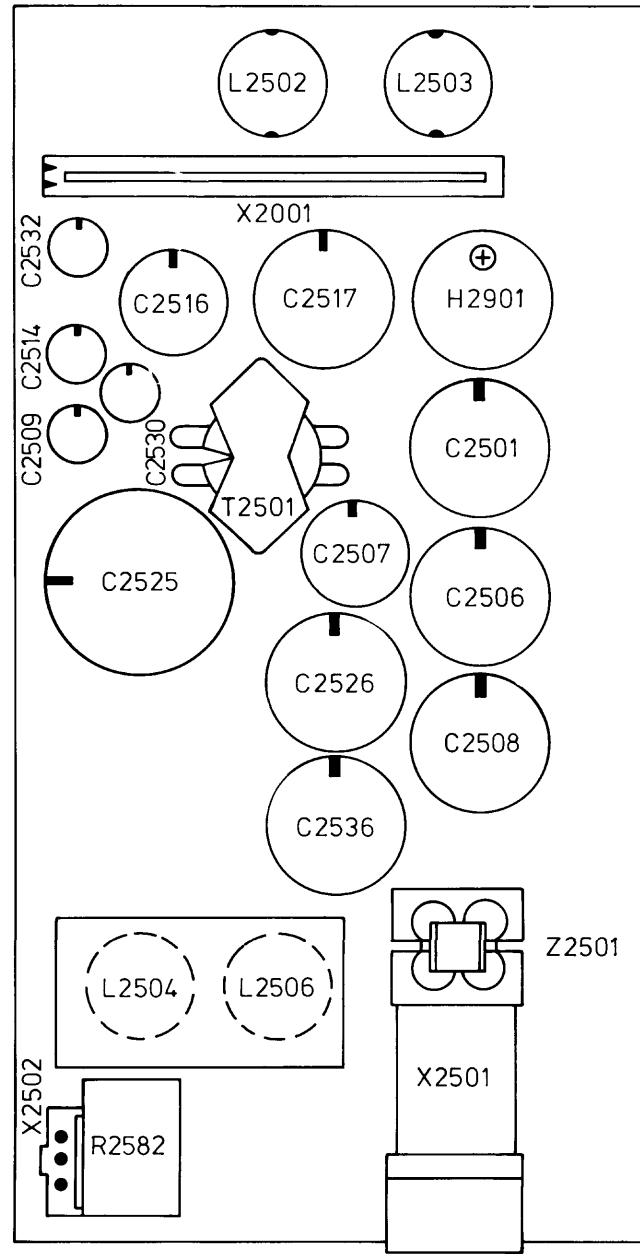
Analog A2 PCB assembly (SMD components side) revision level 22 and higher. For assembly drawings of older versions see Figures 10.3 a and 10.3b
